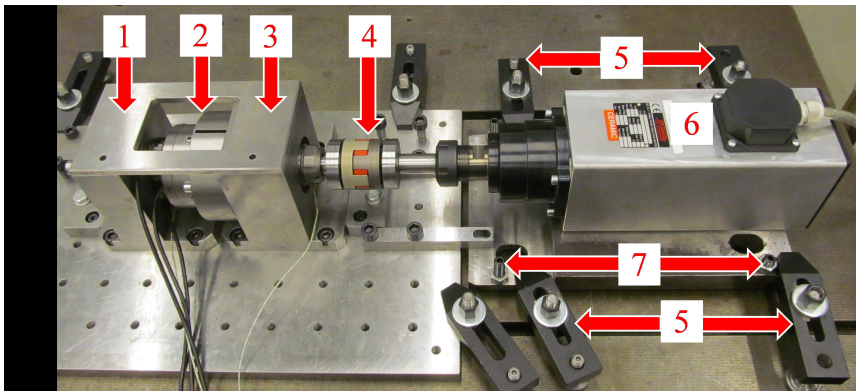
Investigated spindle system: 1 – front support, 2 – active preloading module, 3 – rear support, 4 – ROTEX coupling made by KTR, 5 – clamping arms, 6 – high-speed motor type C5160D-DB-PER32 made by TEKNOMOTOR, 7 – adjusting screws
